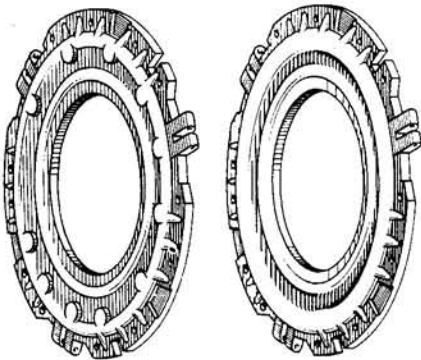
View showing early (left) and late (right) production transmission clutch pressure plate (2—Fig. 111).
